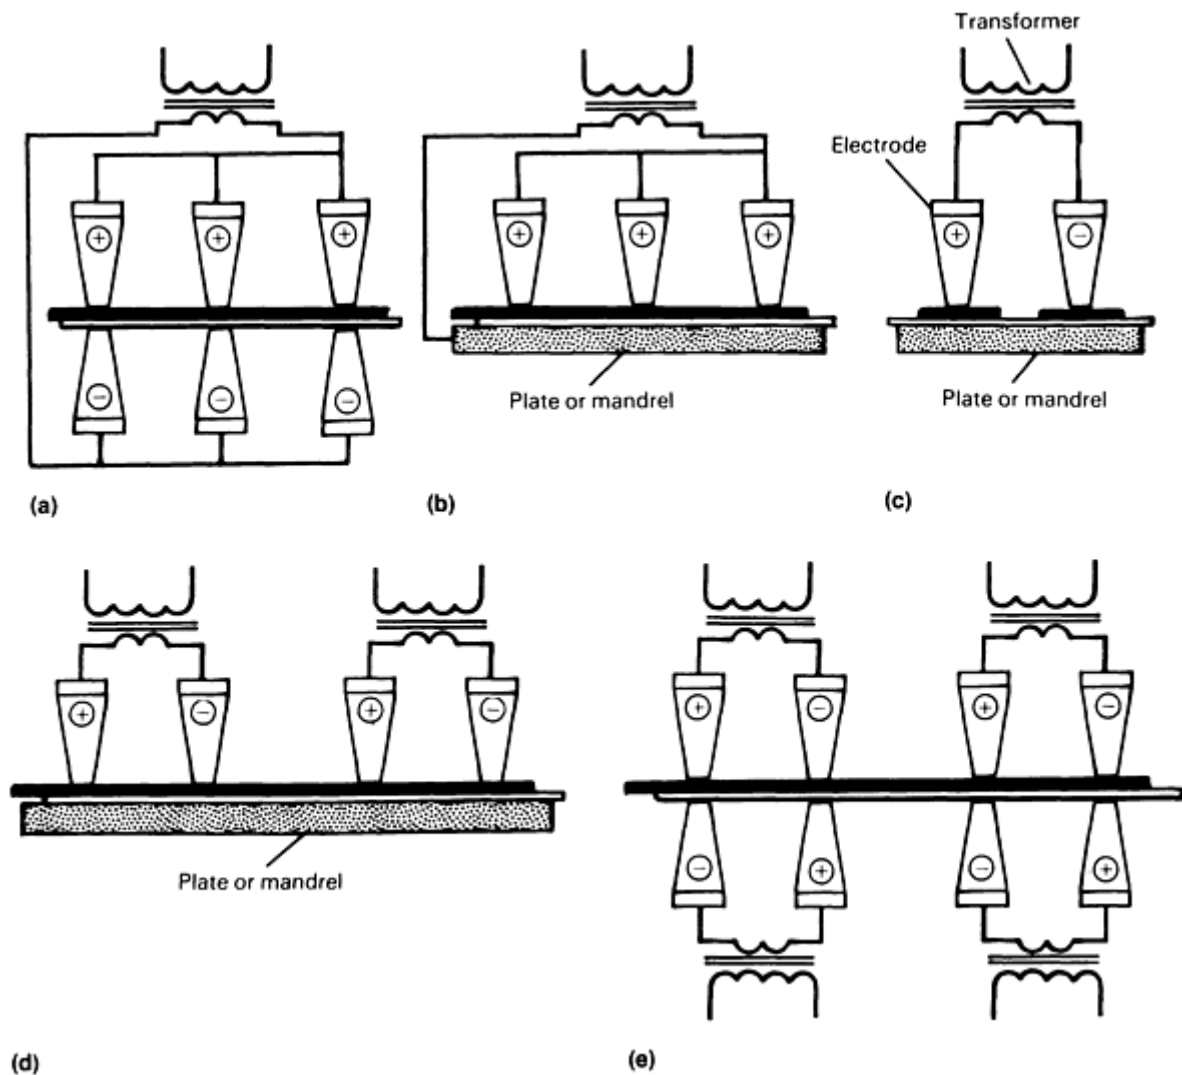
RELATION OF WORK METAL TO ELECTRODES WHEN MAKING MULTIPLE-SPOT WELDS. (A) AND (B) DIRECT WELDING. (C), (D), AND (E) SERIES WELDING
